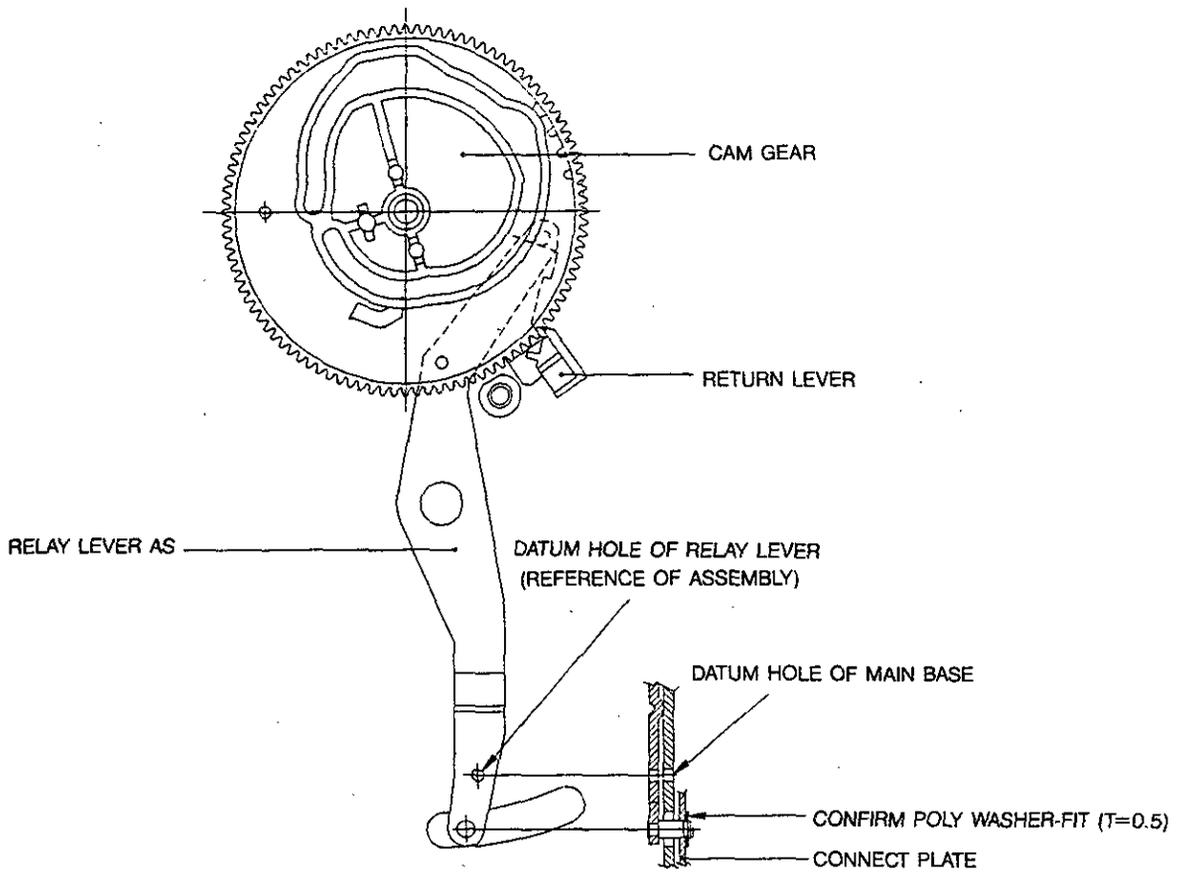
Reference of assembly for the Cam Gear and Relay Lever
